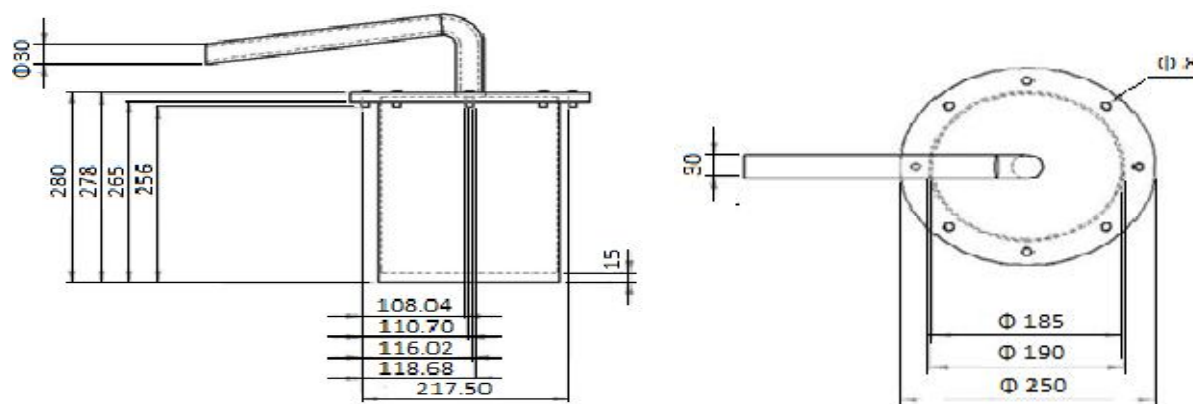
Cylindrical oil tank with dimensions in mm, (a) front view, (b) plan view.
